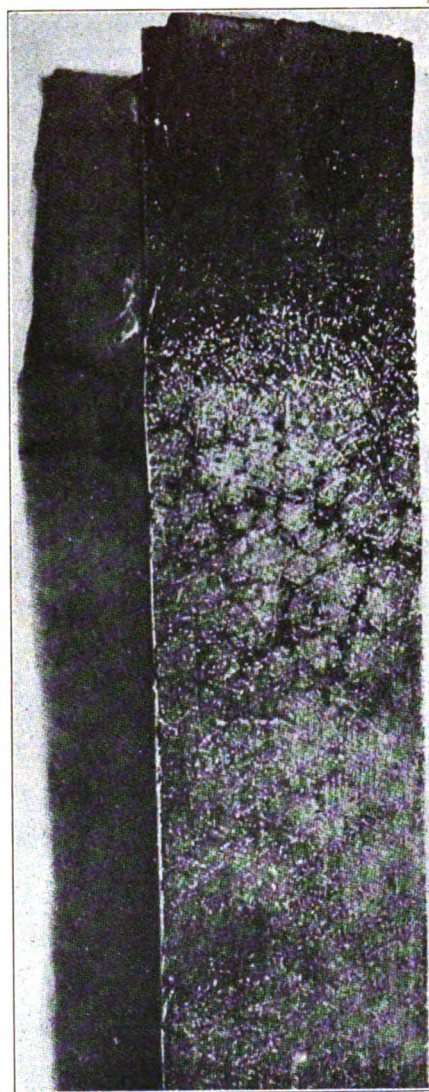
Macrostructure of used ingot mold showing decarburization of the inner surface extending to same depth.
